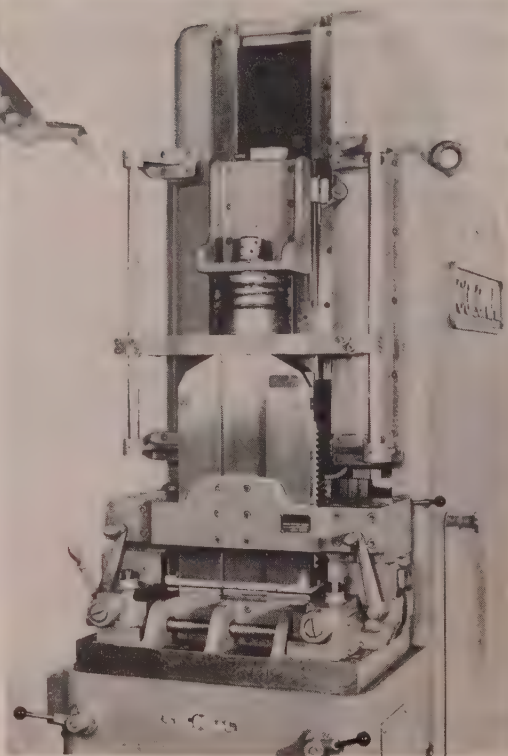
(right) — This 6-ton pull-down broaching machine, with a 36-inch stroke, is used for broaching the part shown in Fig. 1
